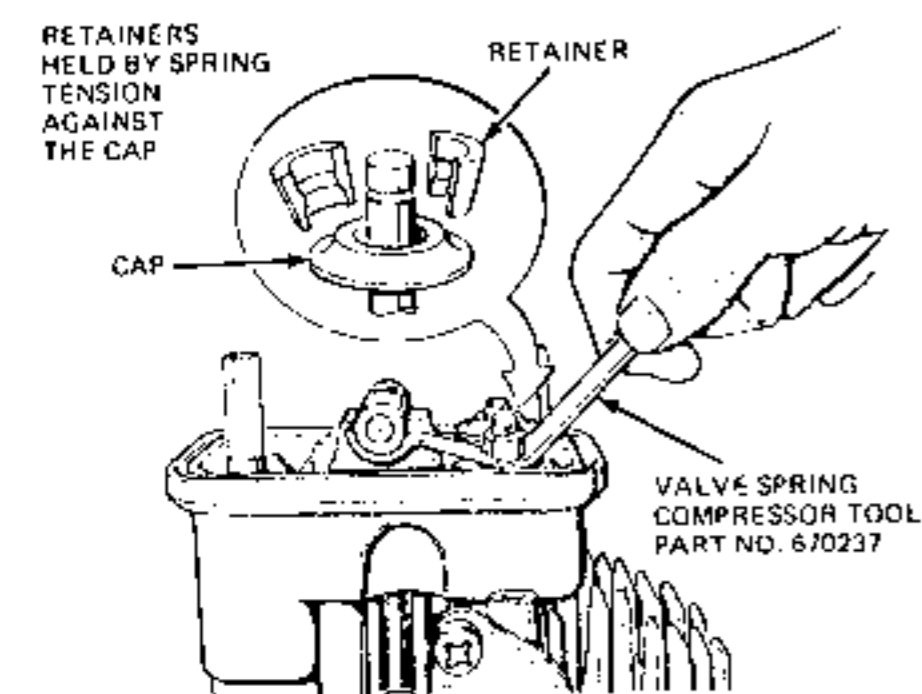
Use tool #670237 to compress valve springs while removing retainers.
